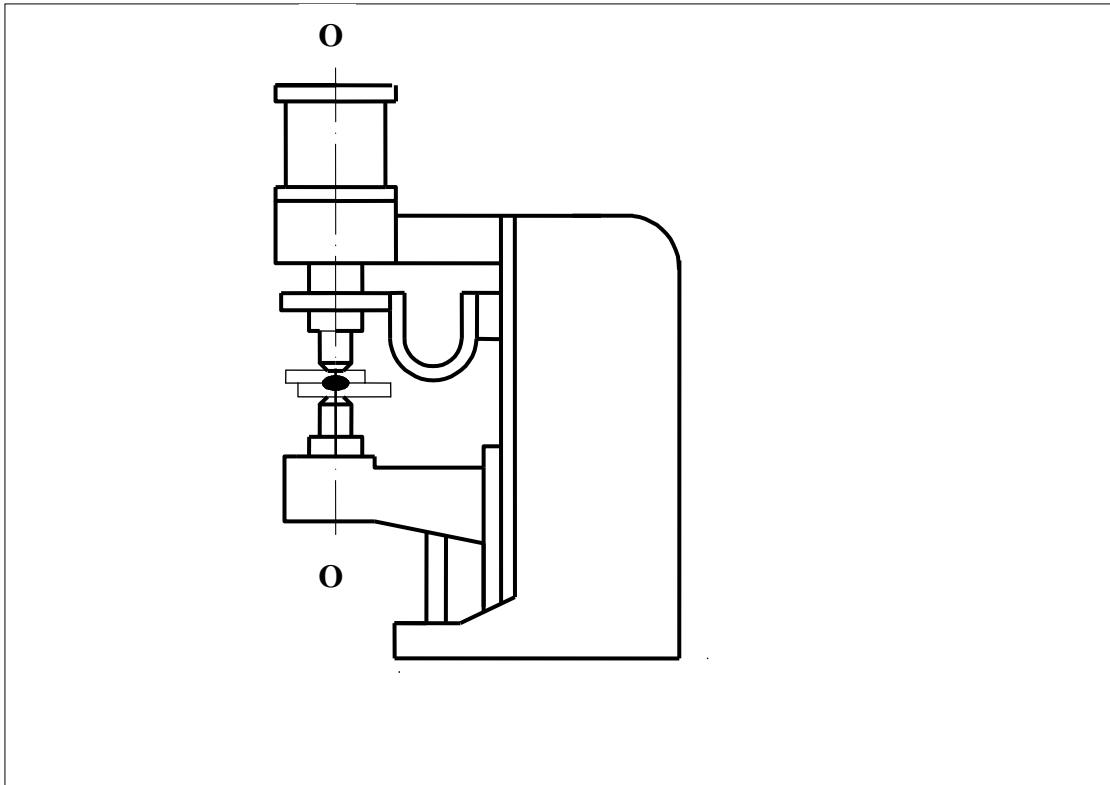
A sketch of resistance welding machine with C-frame
